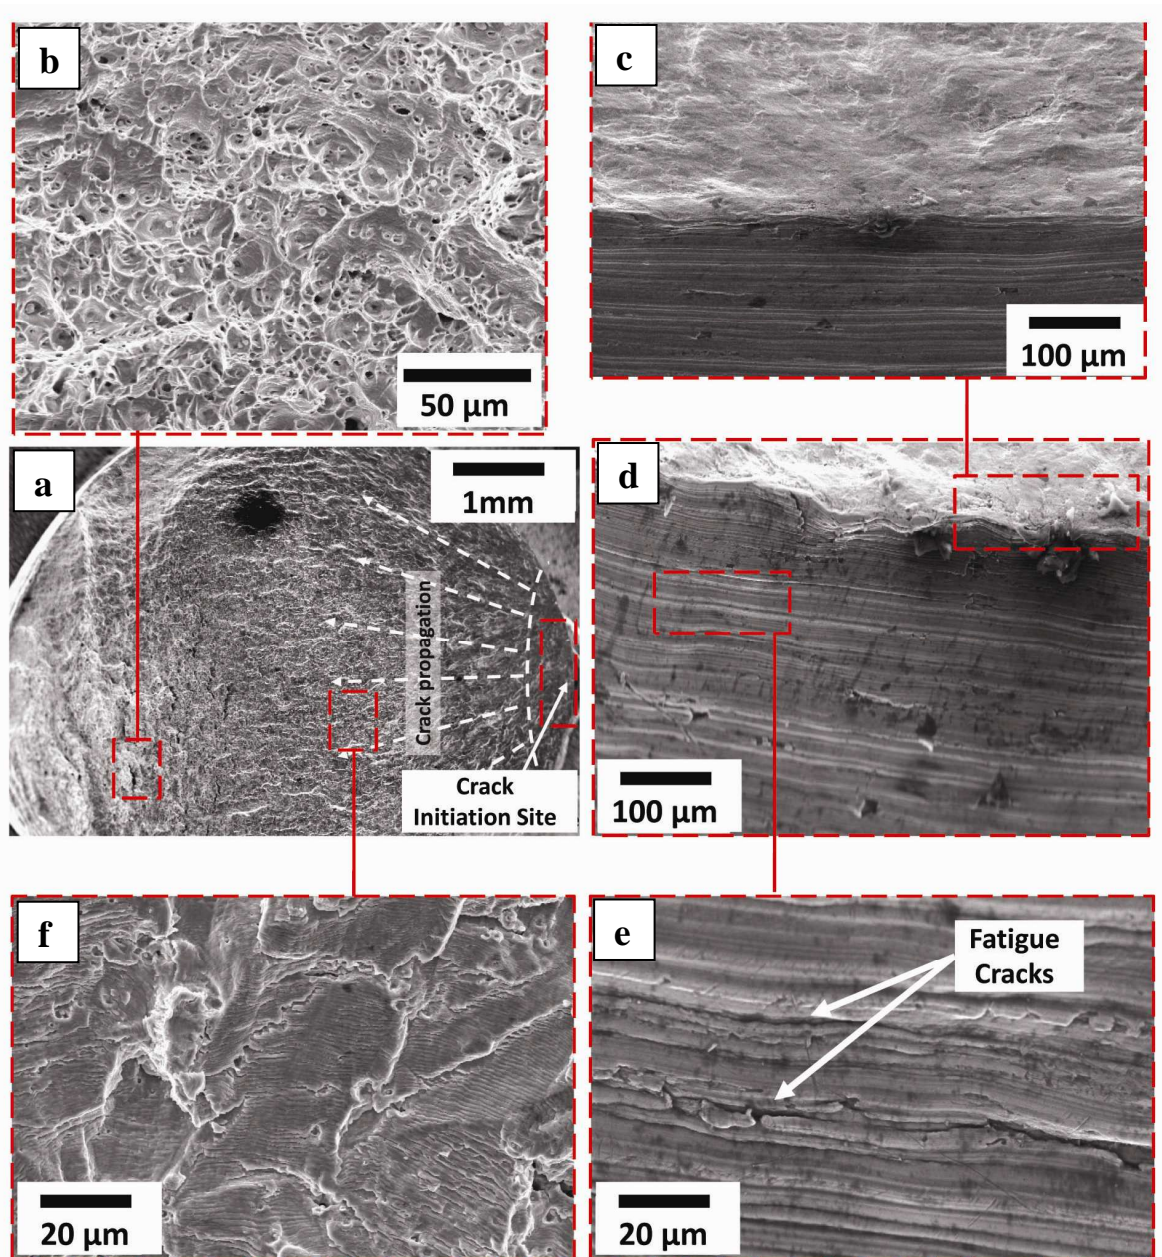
23: a) Fracture surfaces of AISI 316L, fine machined (1) and fatigue tested at 322 MPa. ; b) Dimples; c) Crack origin zone; d) Lateral view of crack origin; e) Lateral view of crack origin zone show fatigue cracks; f) striations.
